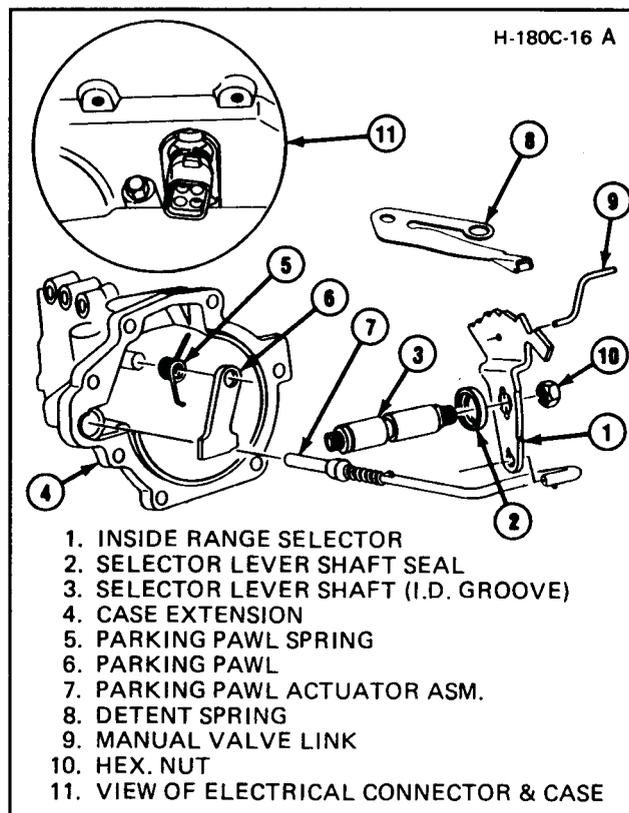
C-34 Selector Lever Assembly and Electrical Connector
